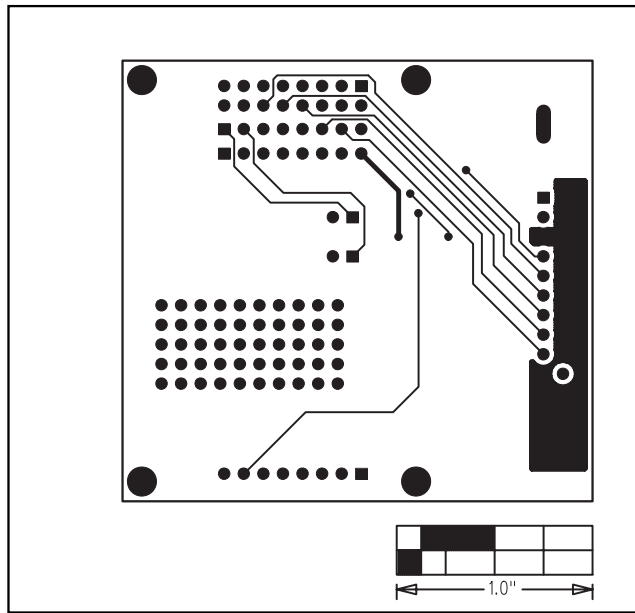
MINIUSB-XHV Expander PCB Layout—Solder Side
